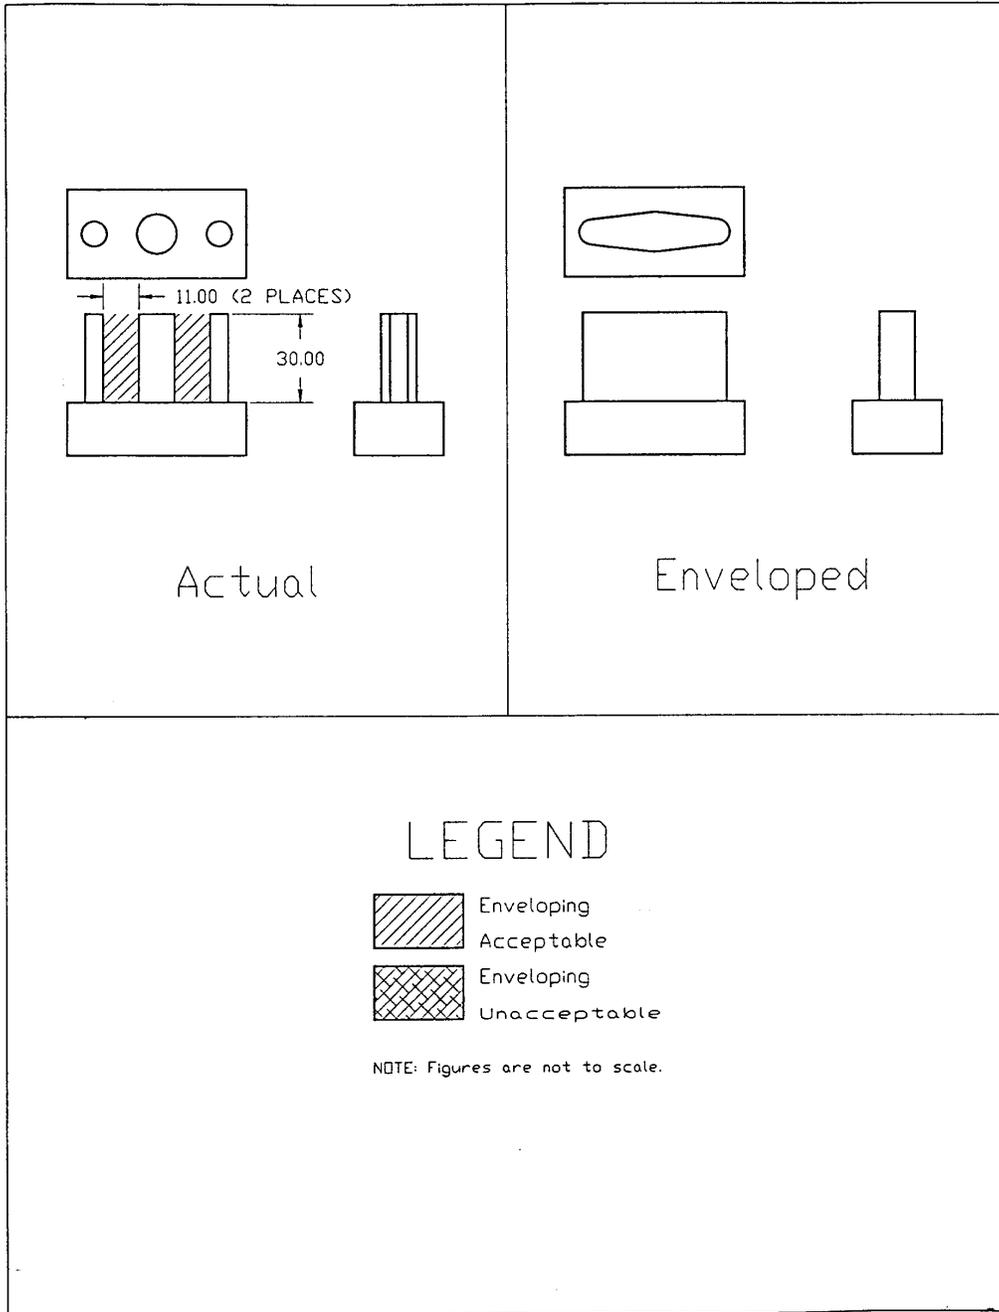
Static envelope examples (sheet 2 of 3).
